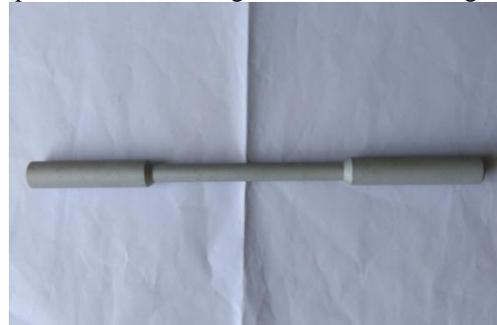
Specimen of Coated (Anodizing Without Sand Blasting)
